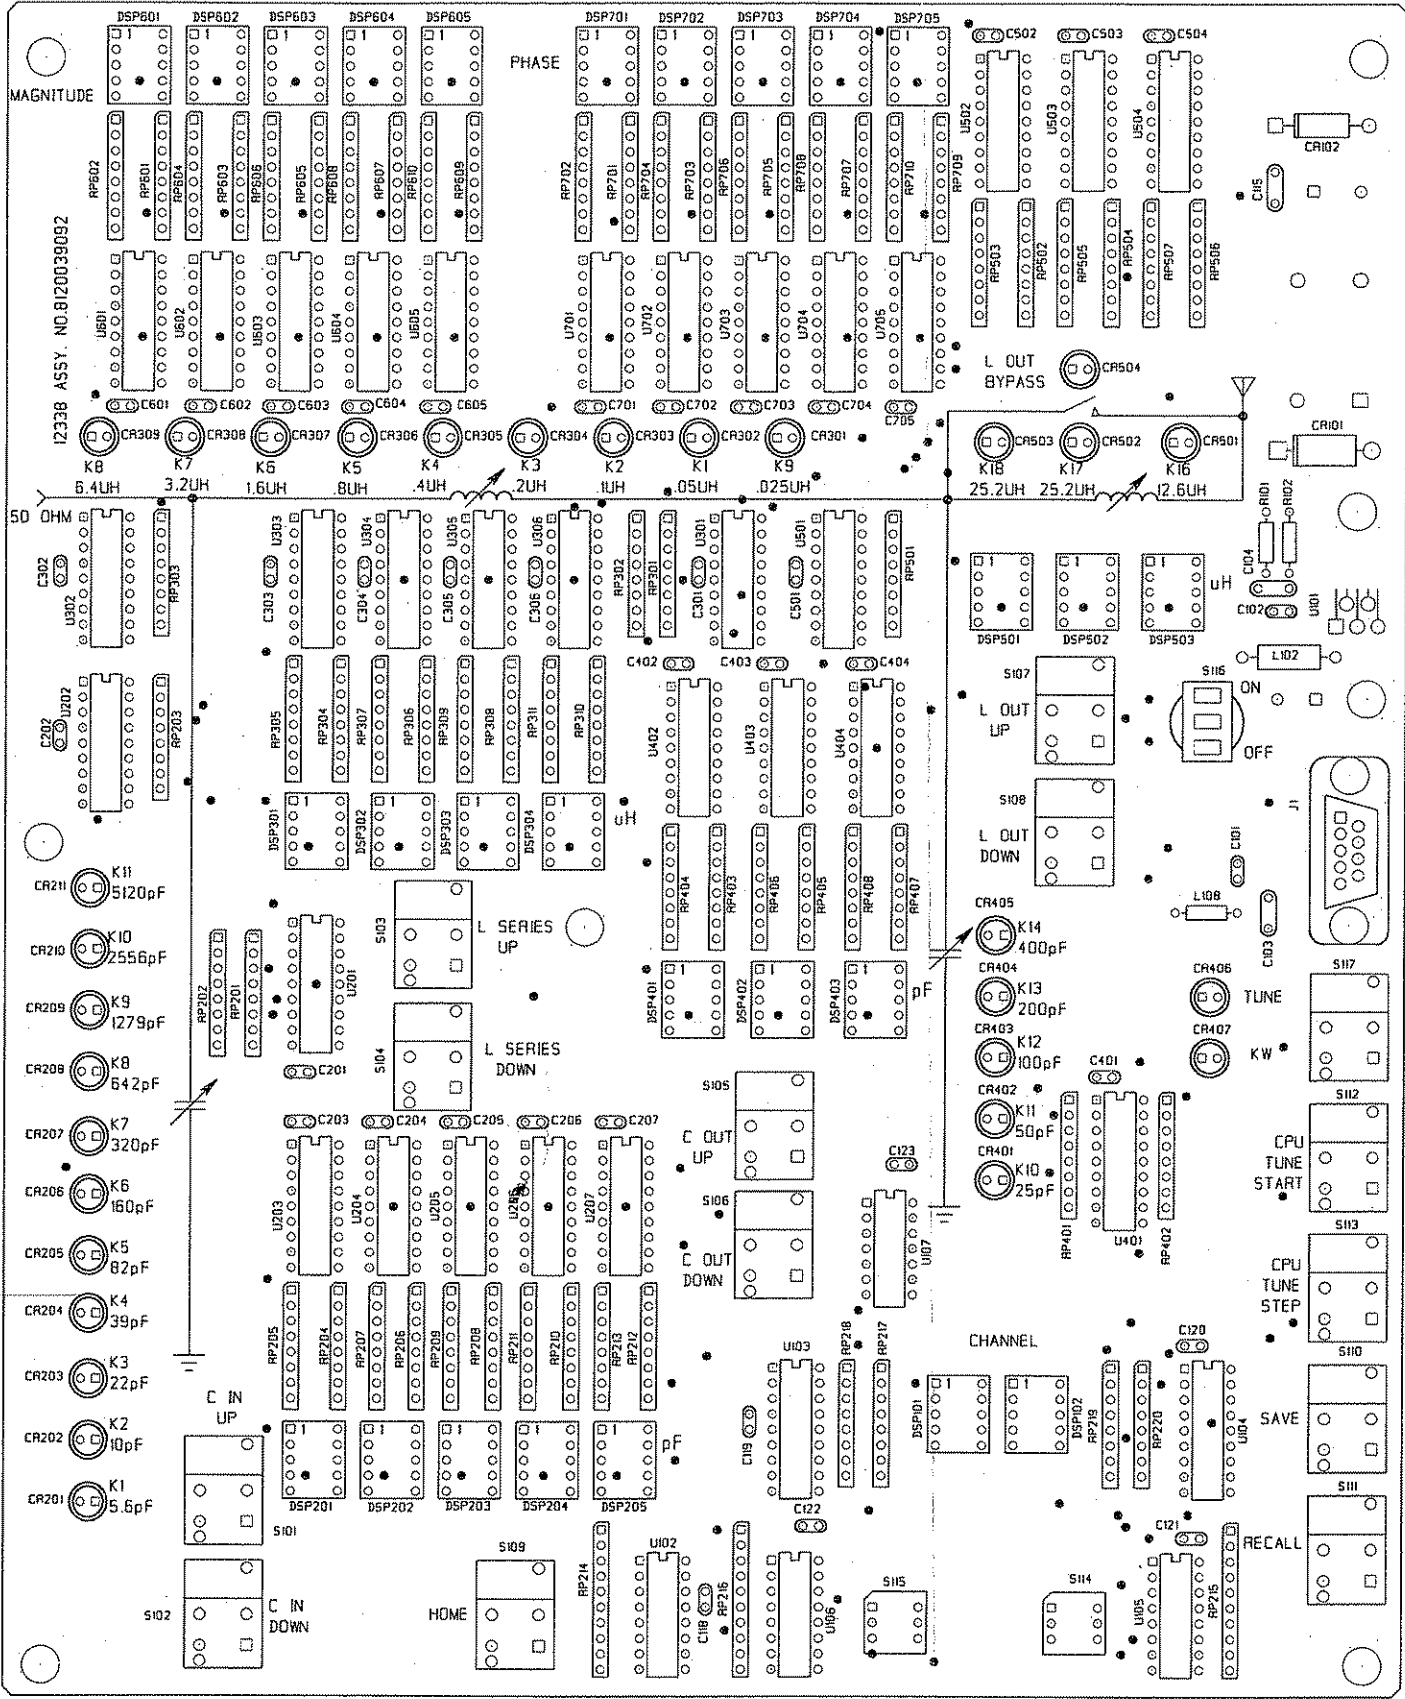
PC Assembly, Serial Breakout Board, page 1/2.
